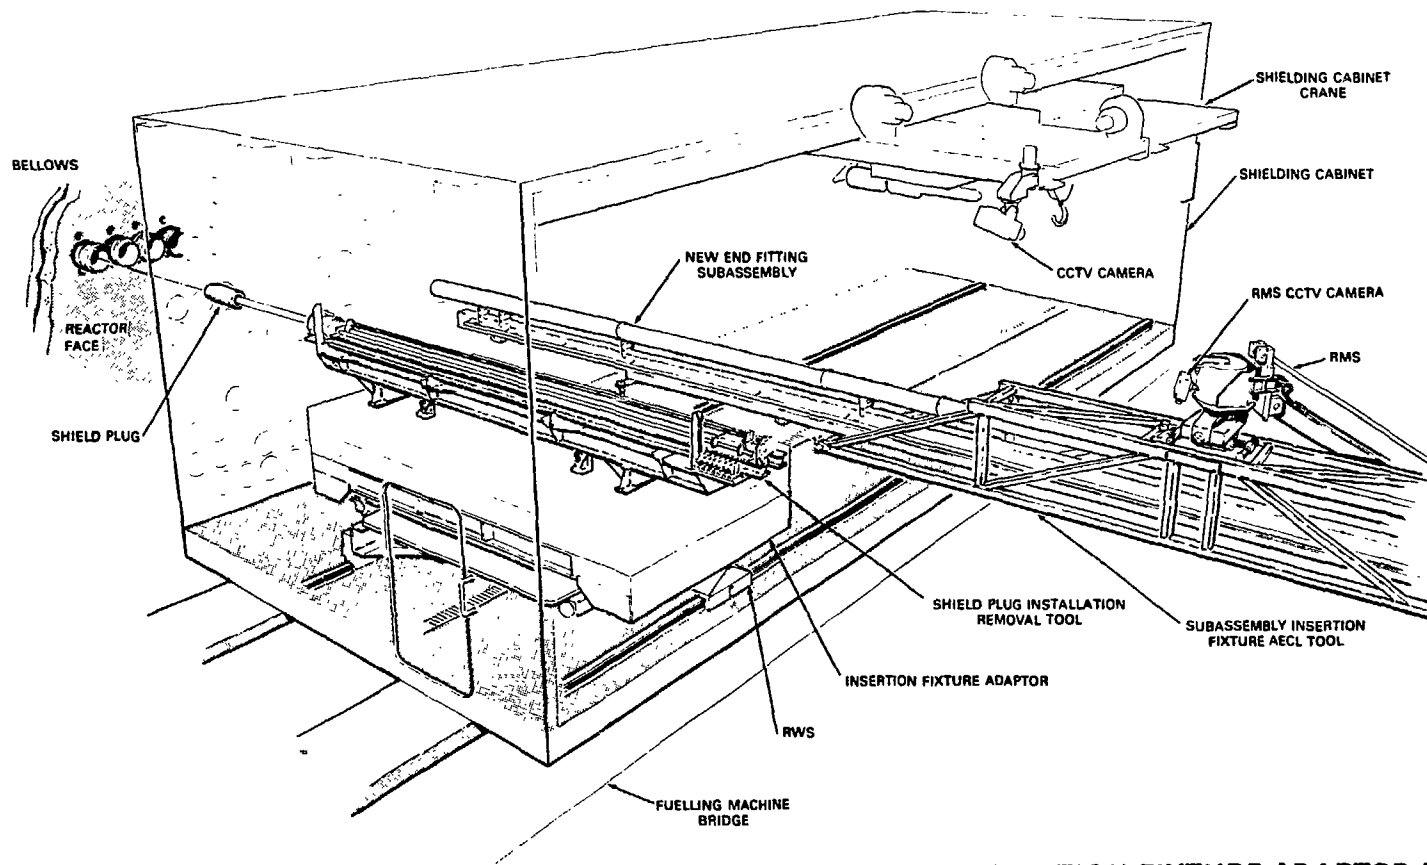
INSERTION FIXTURE ADAPTOR (IFA)
